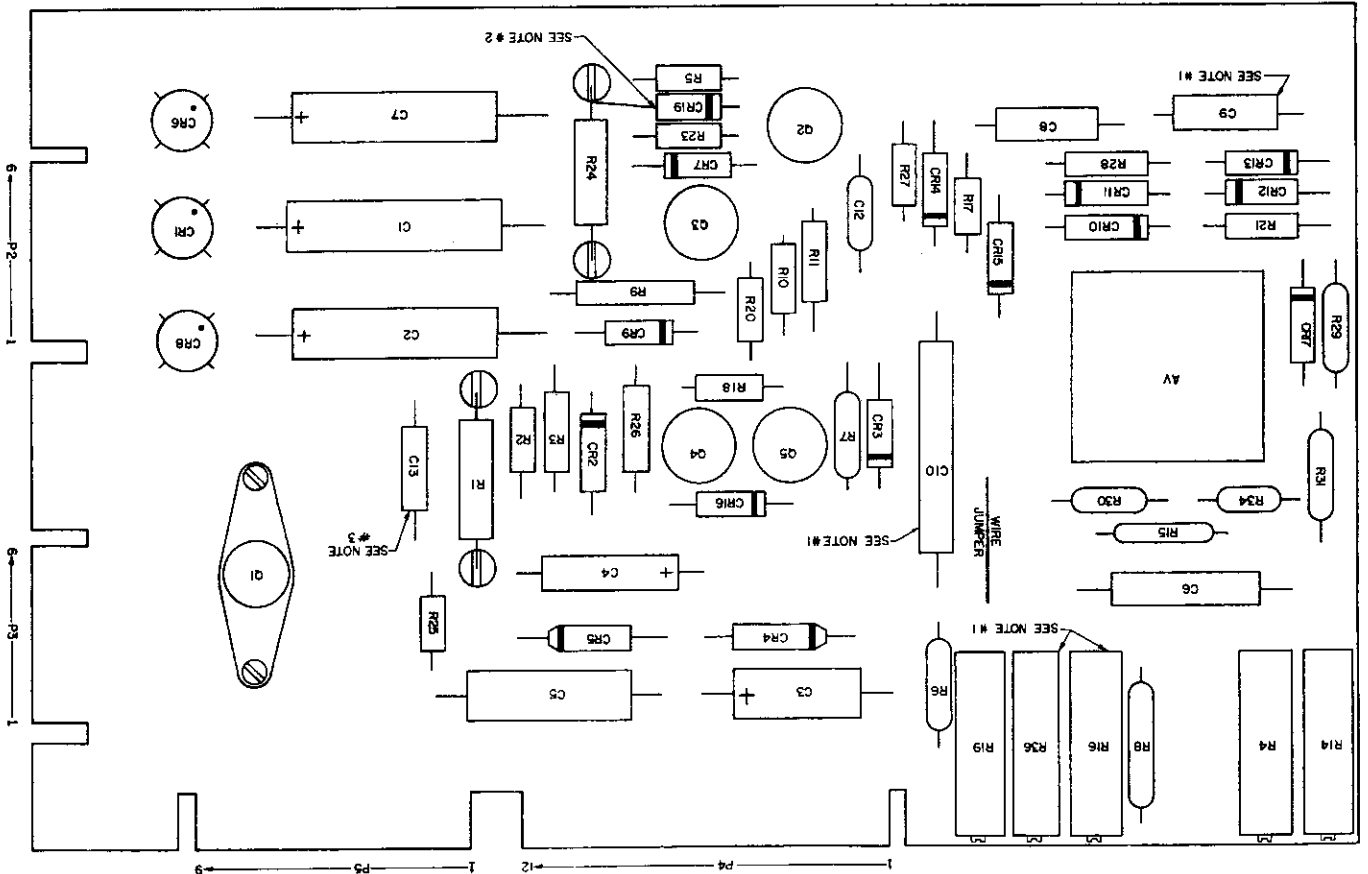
COMPONENT LOCATION, AMPLIFIER AND VP ASSEMBLY
